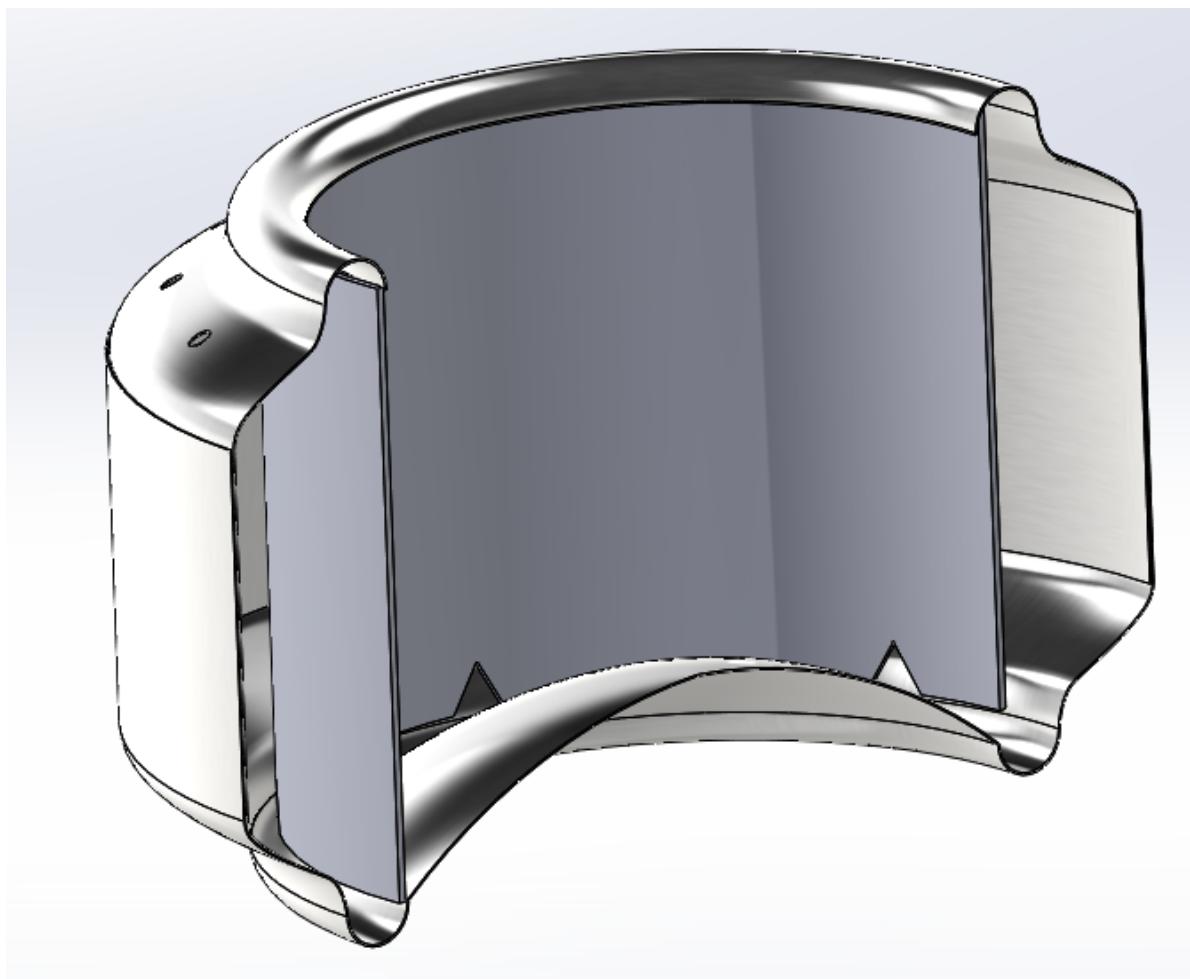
Cookstove Cross Sectional View from SolidWorks Model to Show Pressure Chamber Ring.
